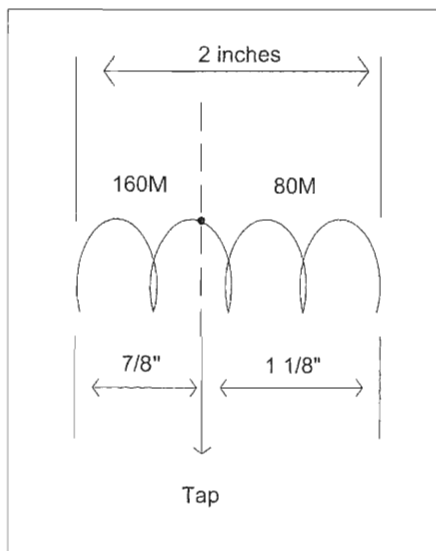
Layout diagram for the new 160-80 meter tank coil.
